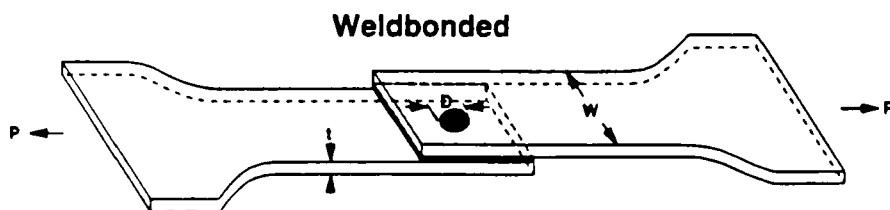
Schematic of a lap-shear weld-bonded joint.
